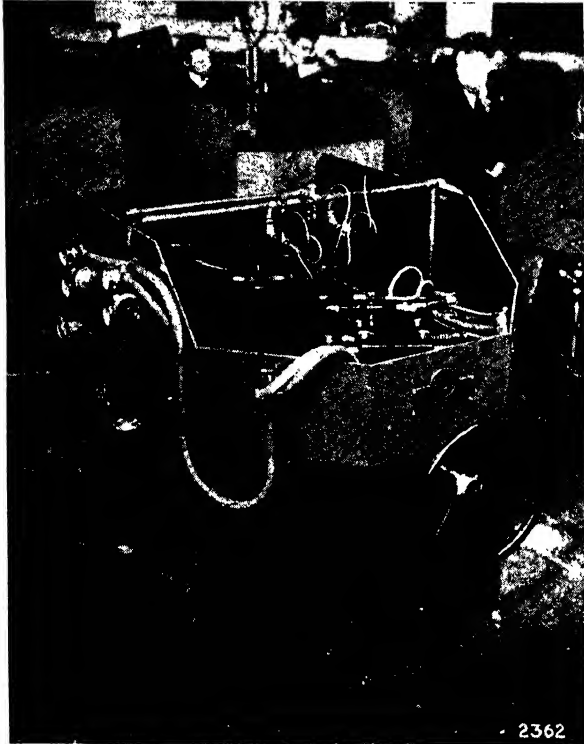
SHORTER TYPE J.2 SPECIAL MACHINE FOR HARDENING SPROCKETS
